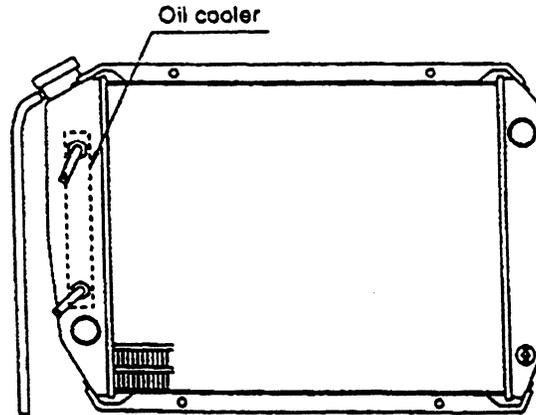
EXAMPLE OF OIL COOLER INSTALLATION
